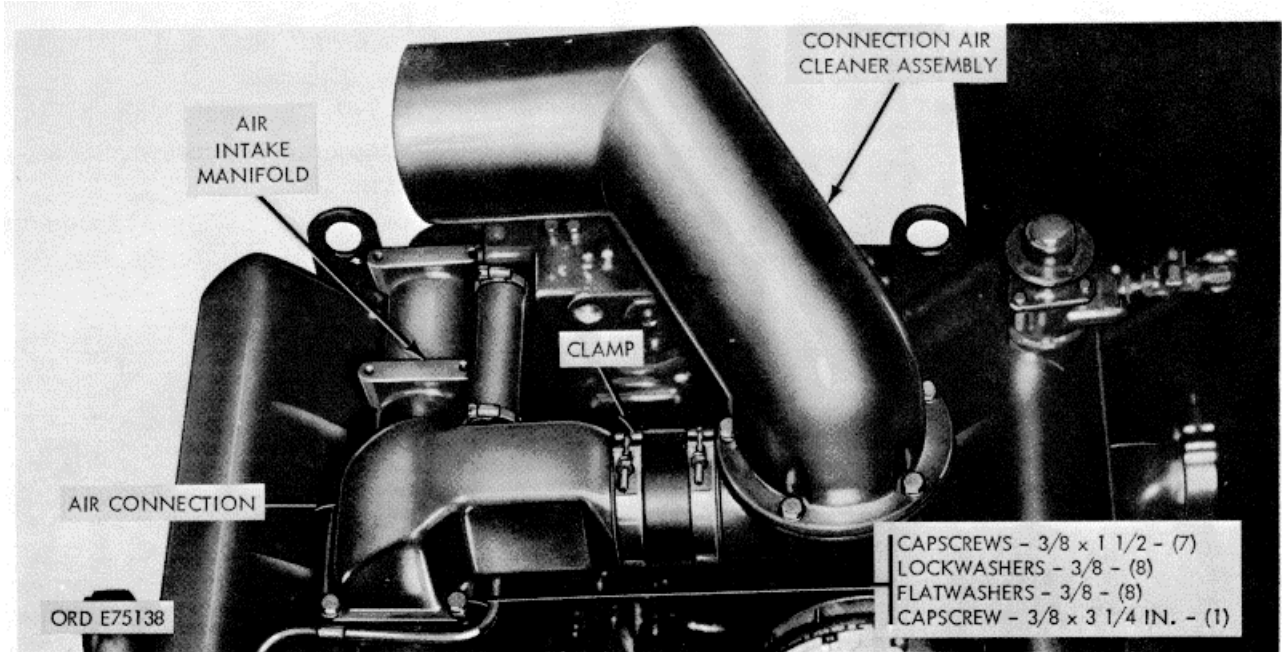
Air intake crossover and preheater assembly--removal/installation.
